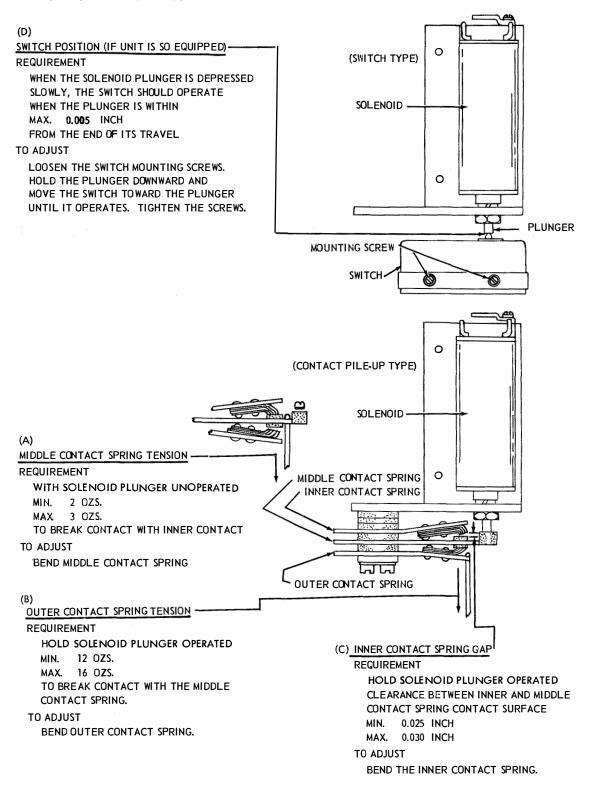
ELECTRICAL SERVICE UNIT, MOTOR CONTROL RELAY
